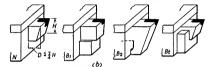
MINIMUM OVERHANG AND RIGID TOOL
